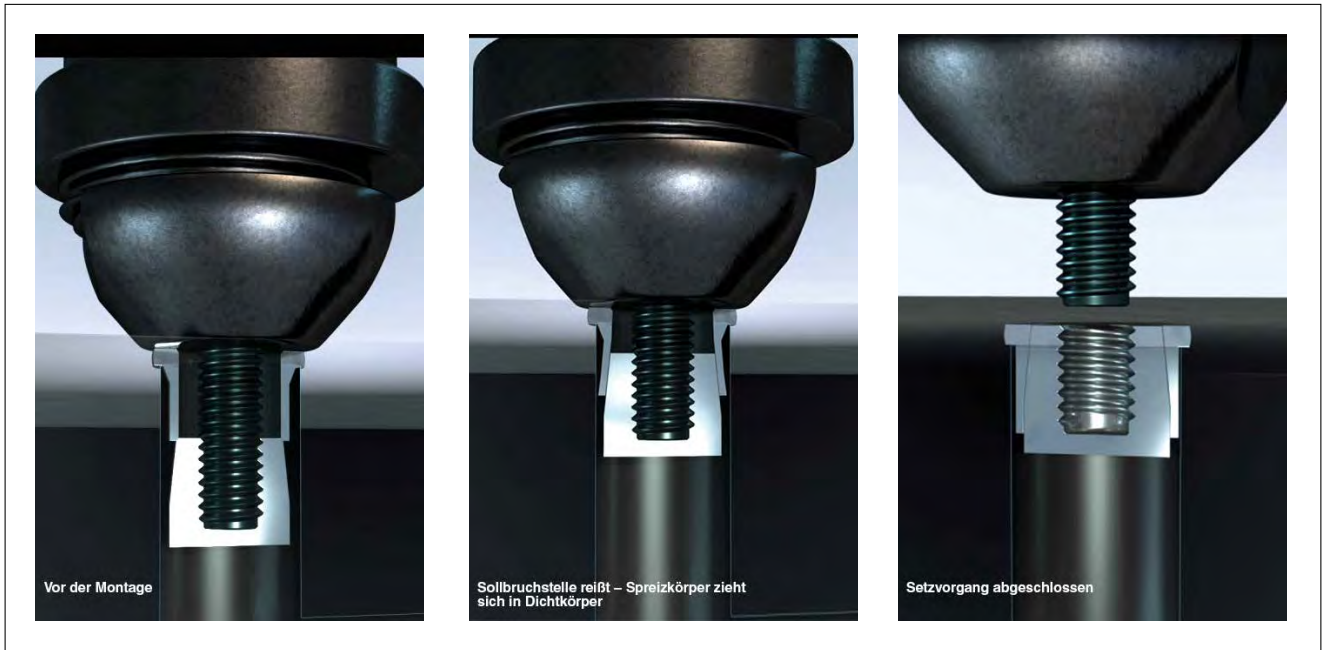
b&m integrated the technology of a blind rivet in a closed blind rivet nut (left: before assembly, middle: predetermined breaking point tears – spreading element is pulled into the sealing body, right: assembly process completed).
